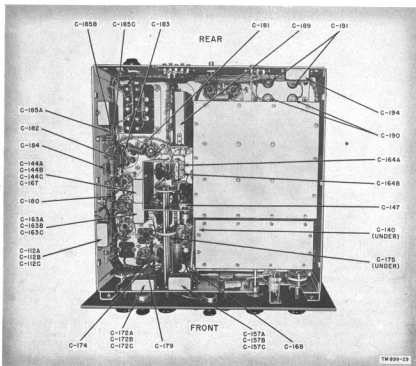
Radio Receiver R-320/FRC, bottom view of chassis, showing capacitors.
